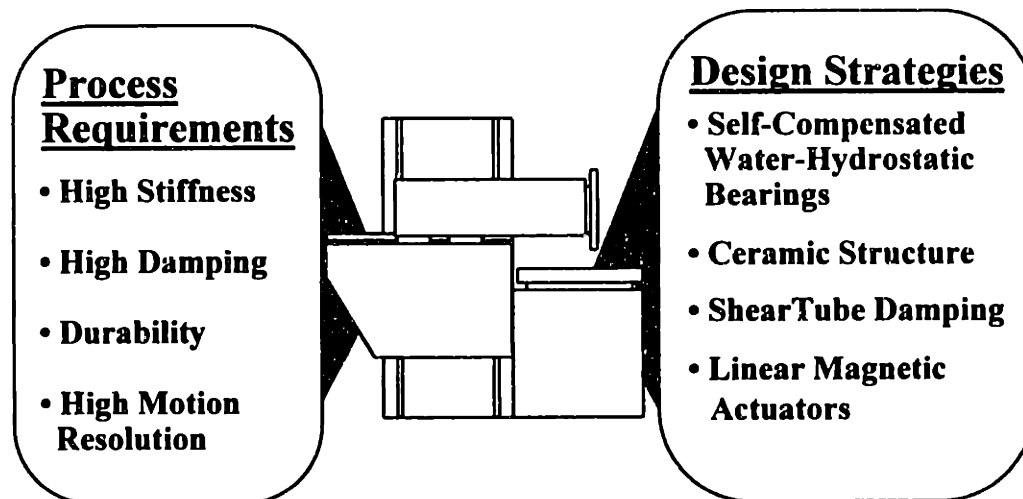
Diagram of machine tool requirements (left) and new technologies (right) for ceramic grinding machines.
